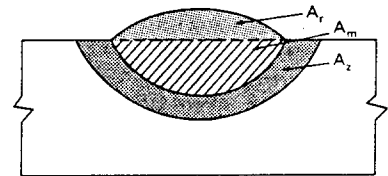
Bead on Plate Weld Effected Zone
